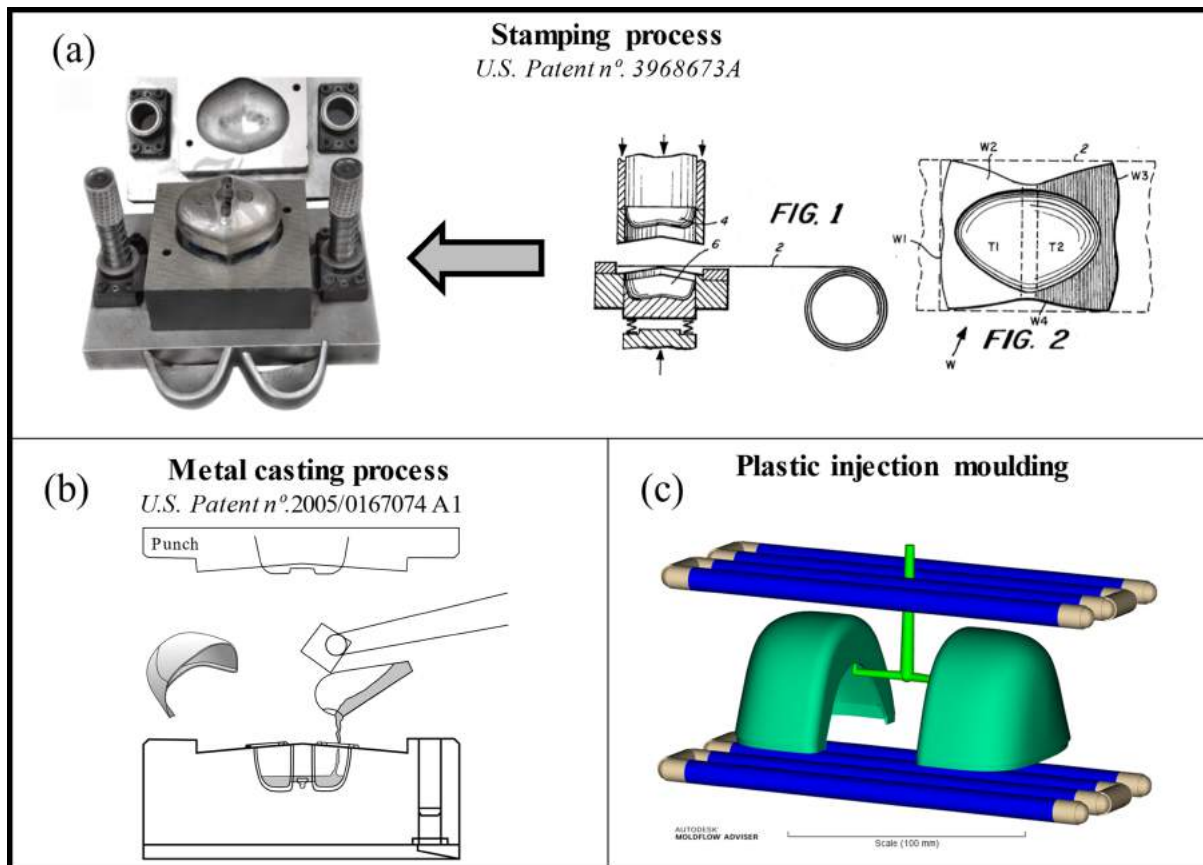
Industrial processes used to manufacture toe caps for safety footwear through (a) stamping and (b) casting for metallic toe caps, and (c) injection molding for thermoplastic [33, 76, 77].
